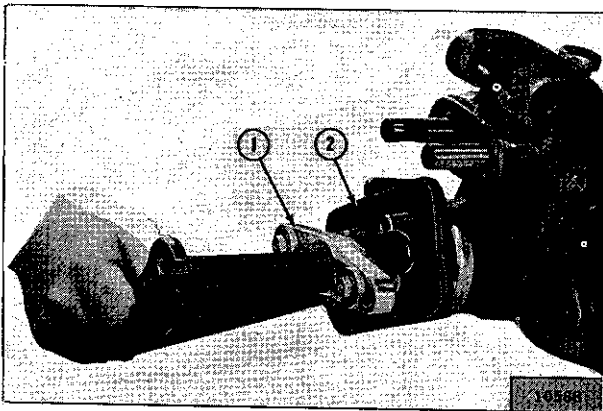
UNIVERSAL JOINT FLANGE PULLER
